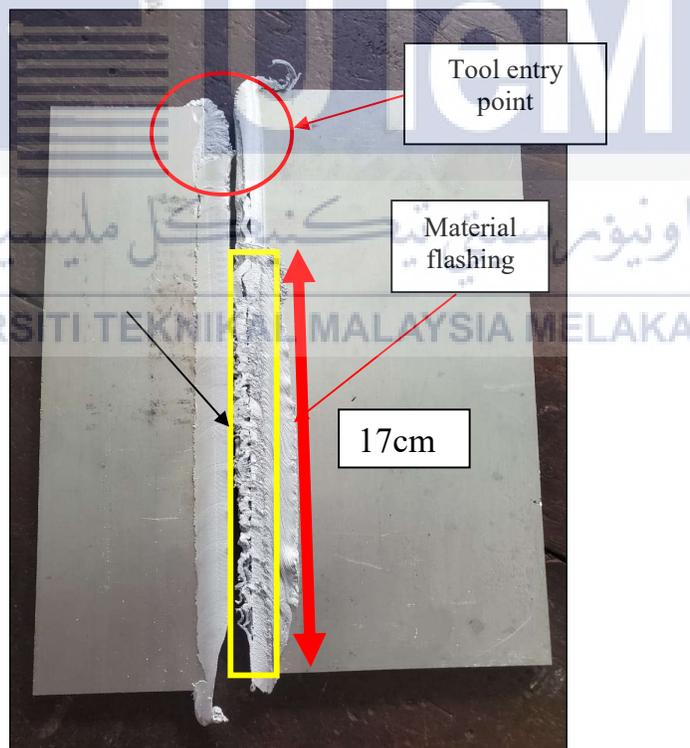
Welded aluminium plate at 600 RPM at 150mm/min.
